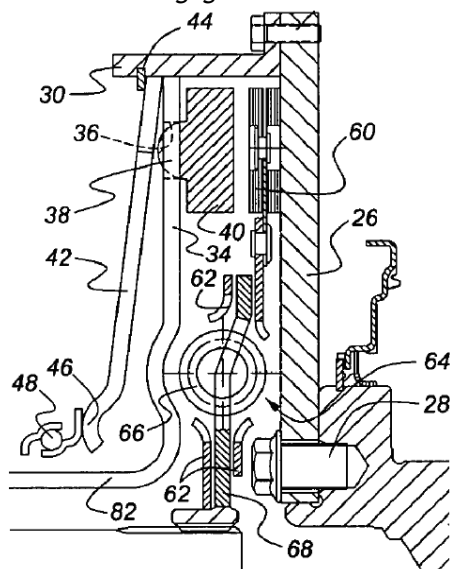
Actively closed dry clutch system (open position) [3]: 48, throwout bearing; 42, lever spring; 40, pressure plate; 60, clutch disc; 26, flywheel.
